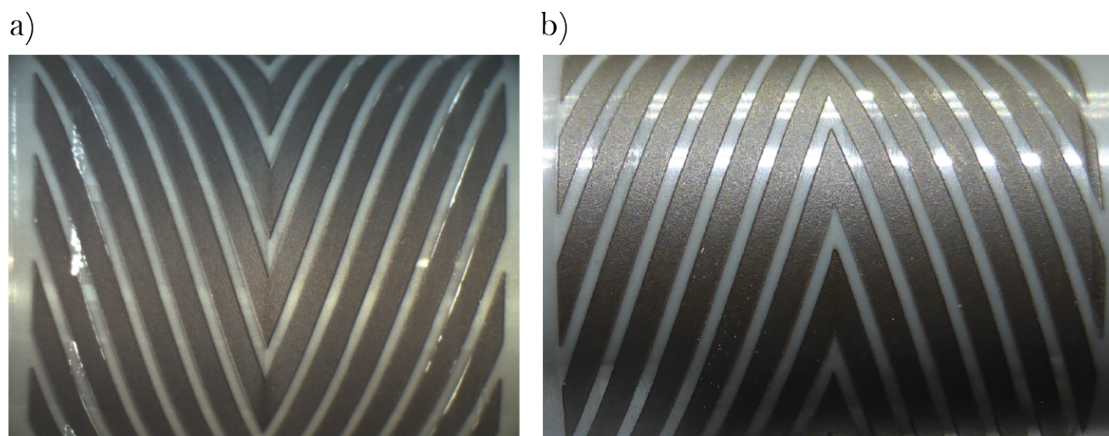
Photograph of rotor shaft after 15000 performed start-stop cycles: a) O-Ring supported bearing bushings; b) Flexible membrane supported bearing bushings
